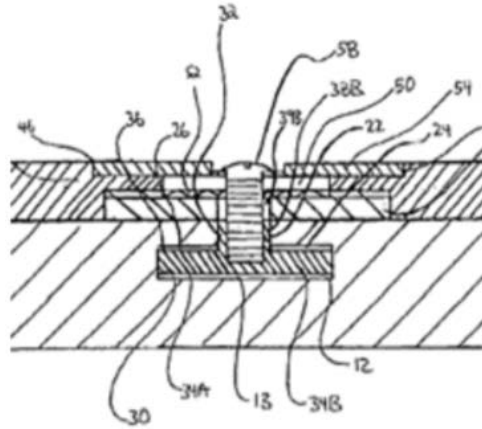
Cross section of a binding mounting system installed into a recreational board
